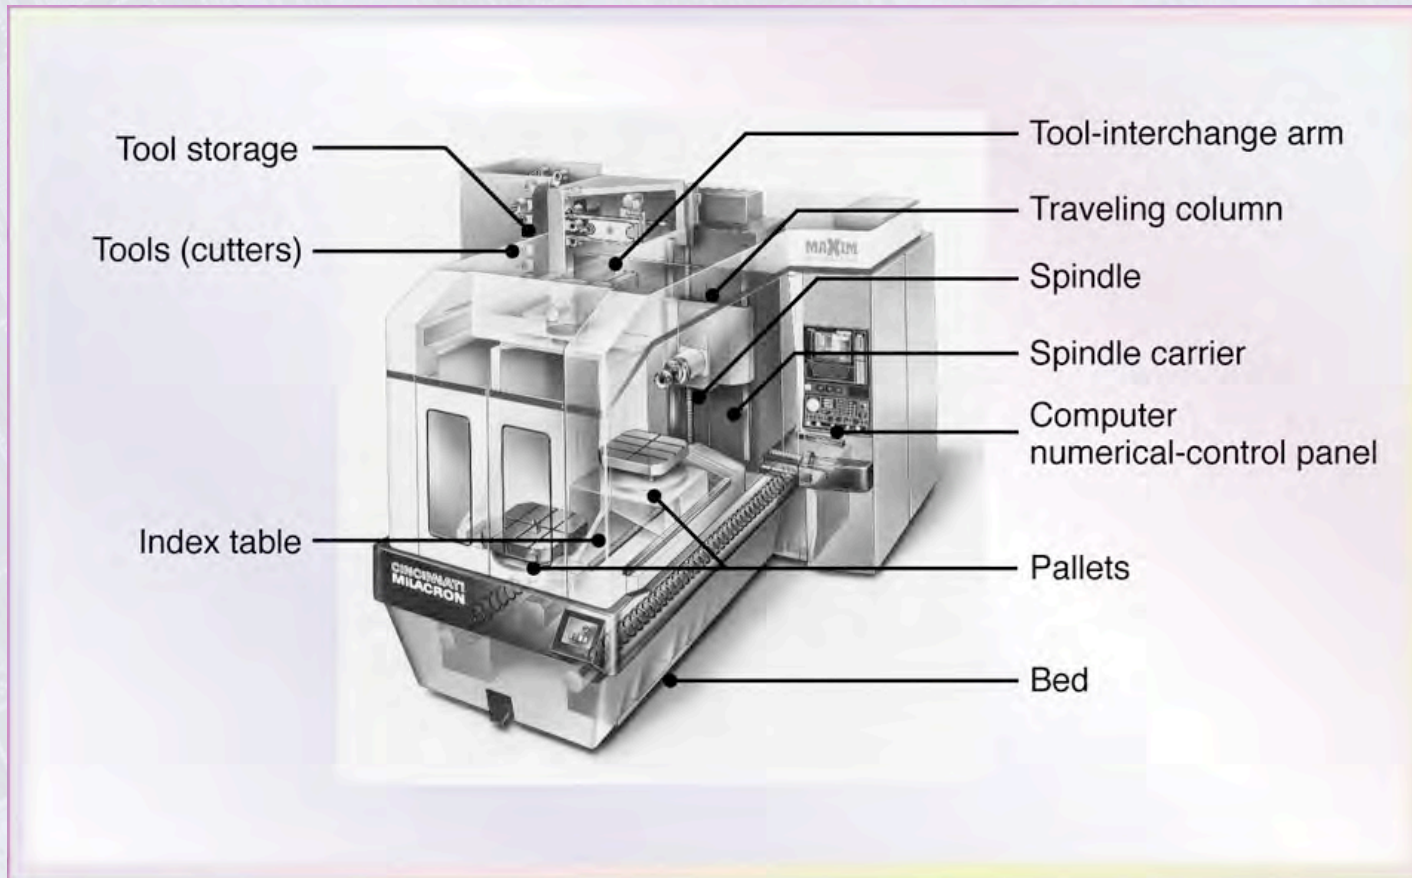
A horizontal-spindle machining center equipped with an automatic tool changer. Tool magazines can store up to 200 cutting tools of various functions and sizes. *Source:* Courtesy of Cincinnati Milacron, Inc.
